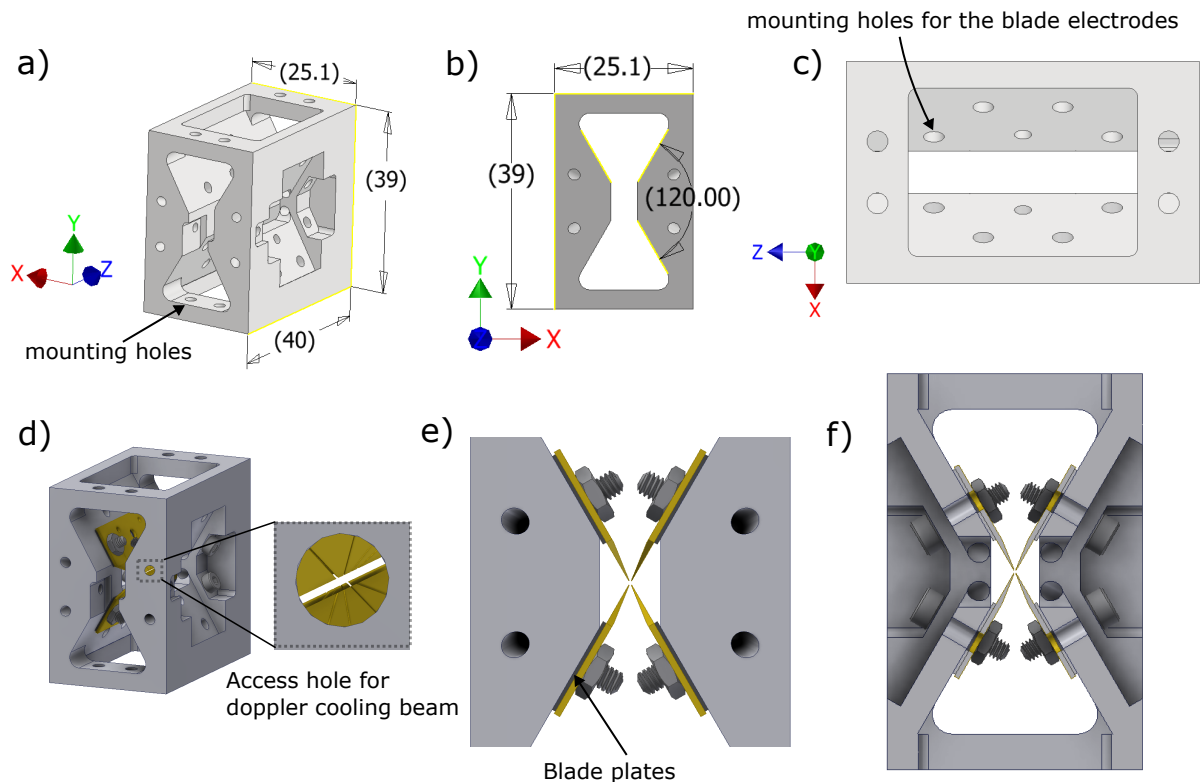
Blade Trap Holder Design: This figure illustrates the geometry of the trap holder, which is designed using ceramic Shapal material. It features four mounting surfaces for blades, allows for easy installation and alignment adjustments through mounting holes, and incorporates a blade plate for perpendicular adjustments of the blades. Length units are in mm, and angle units are in degrees.
